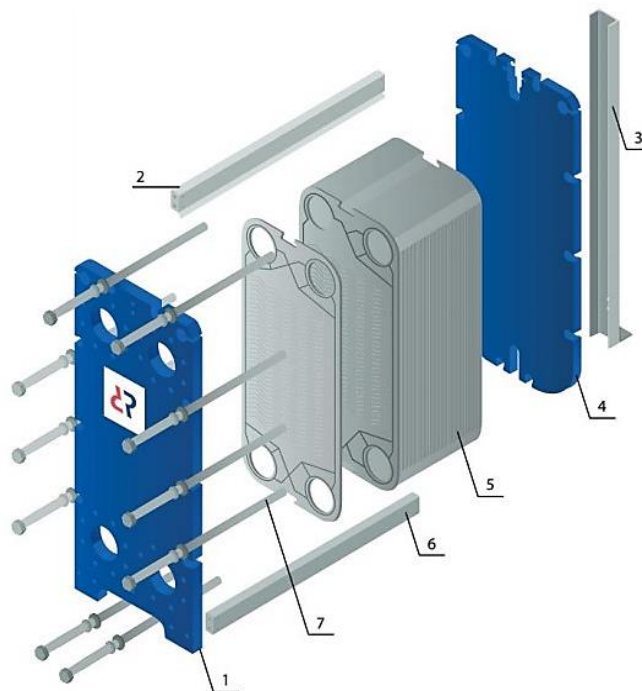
Heat exchanger: 1 - fixed plate, 2 - top guide, 3 - back stand, 4 - pressure plate, 5 - package of plates with gaskets, 6 - lower guide, 7 - tie rods
